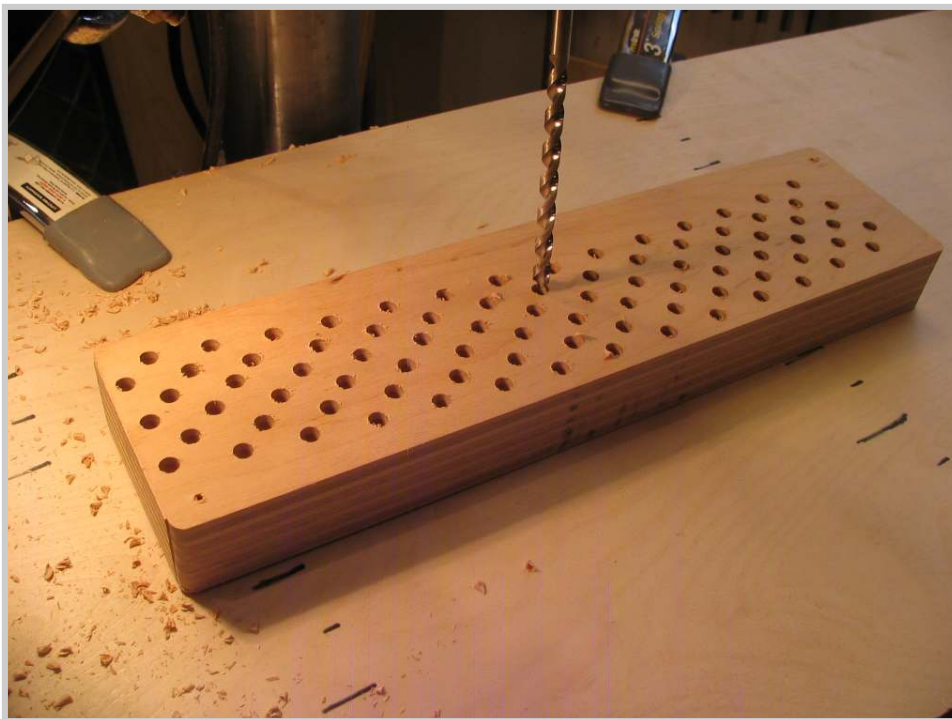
The pin holes are drilled on the drill press. A high speed drill bit is used which is .01" smaller than the size 2 pins to be driven in. A air stream is focused on the drill bit, which helps to keep it cool. With this setup, one hole can be drilled every several seconds continuously. The bit is slightly warm when all the holes are finished.
